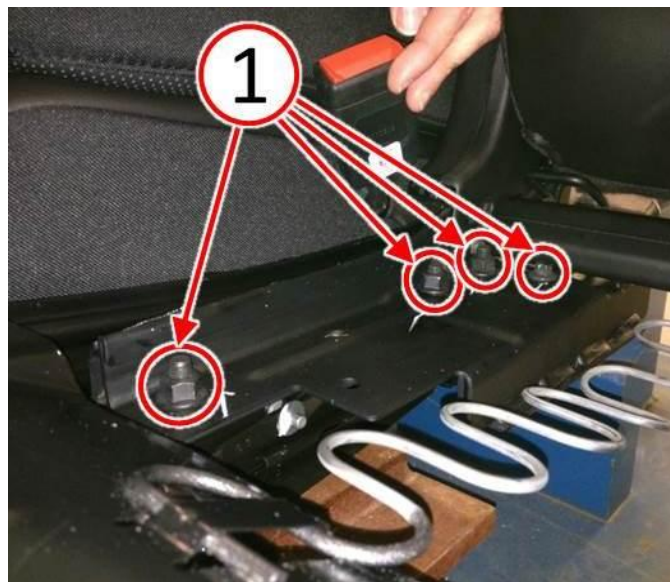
Remove Seat Cushion To Access Seat Rail Fasteners
